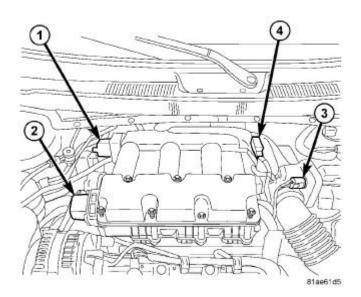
INTAKE TUBE VIEW Courtesy of CHRYSLER LLC
